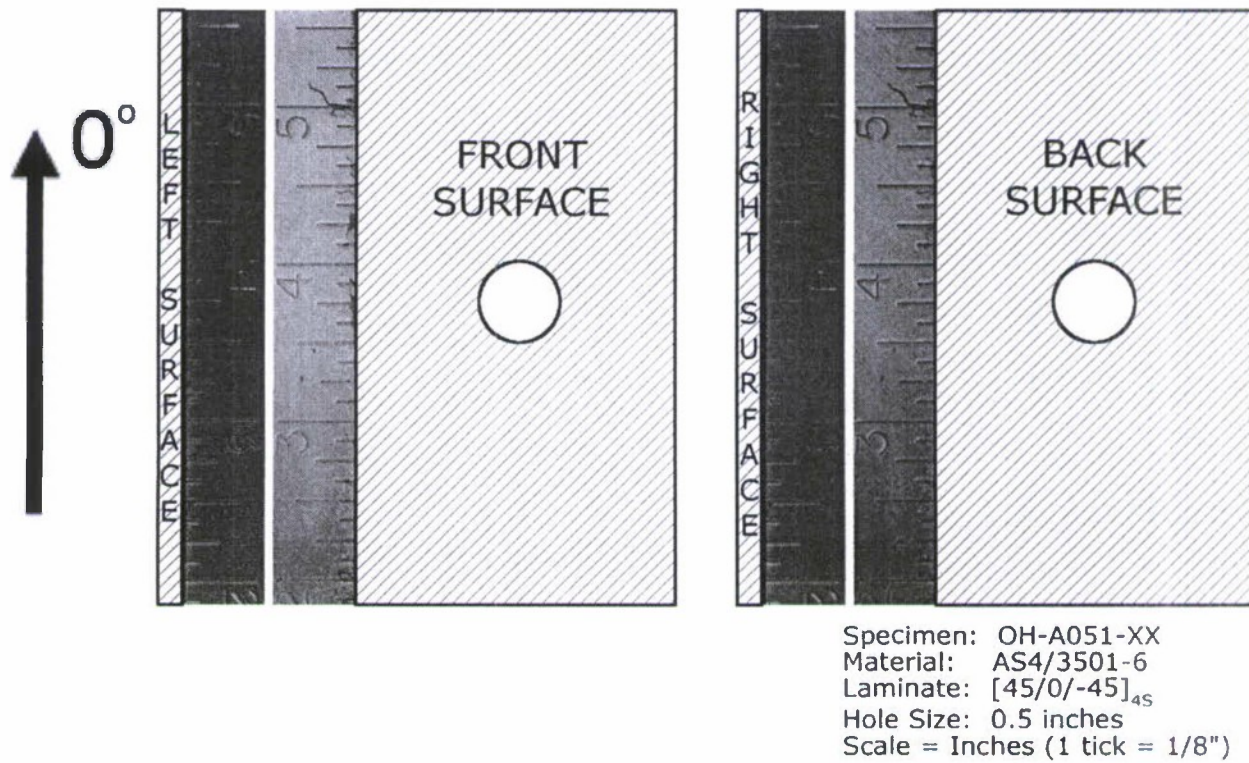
Overall photo documentation layout for the open-hole tension specimens.
